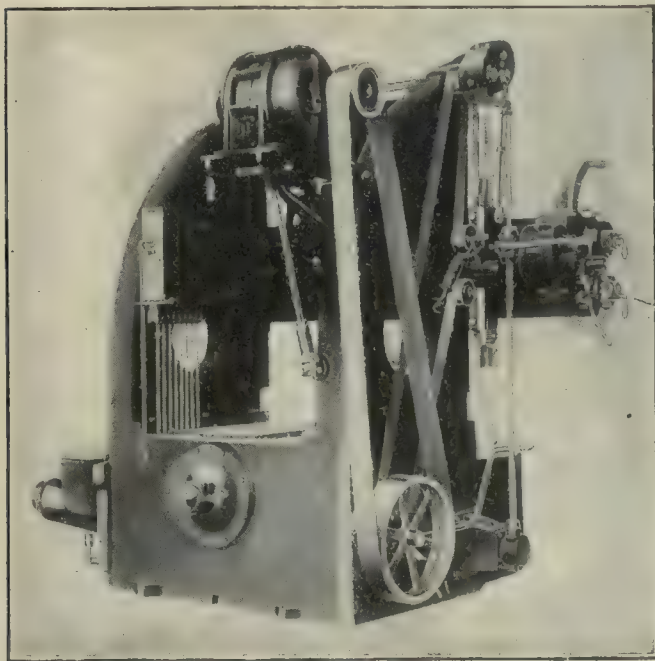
REAR VIEW OF THE "MAXI-MILL," SHOWING THE OILING SYSTEM AND THE MOTOR DRIVE
